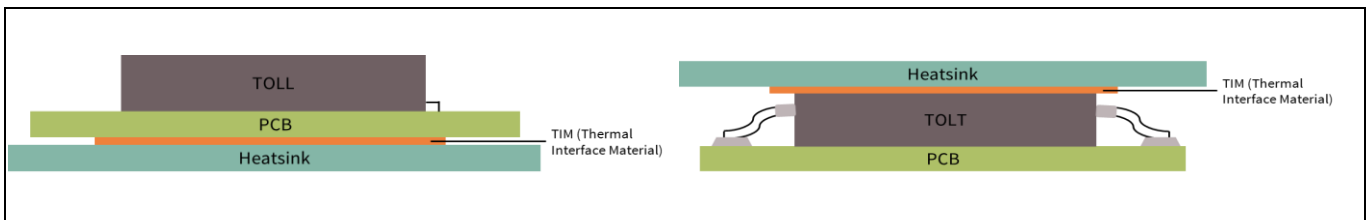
Bottom-side (left) and top-side (right) cooling of SMD power MOSFETs (TOLL and TOLT packages)
